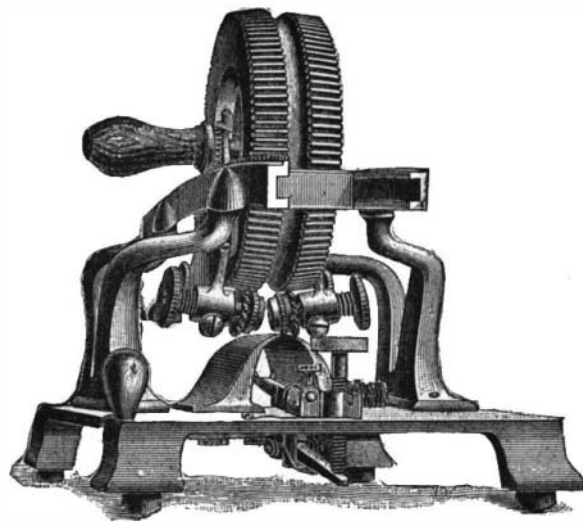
MACHINE FOR GRINDING RAZORS—END VIEW.
